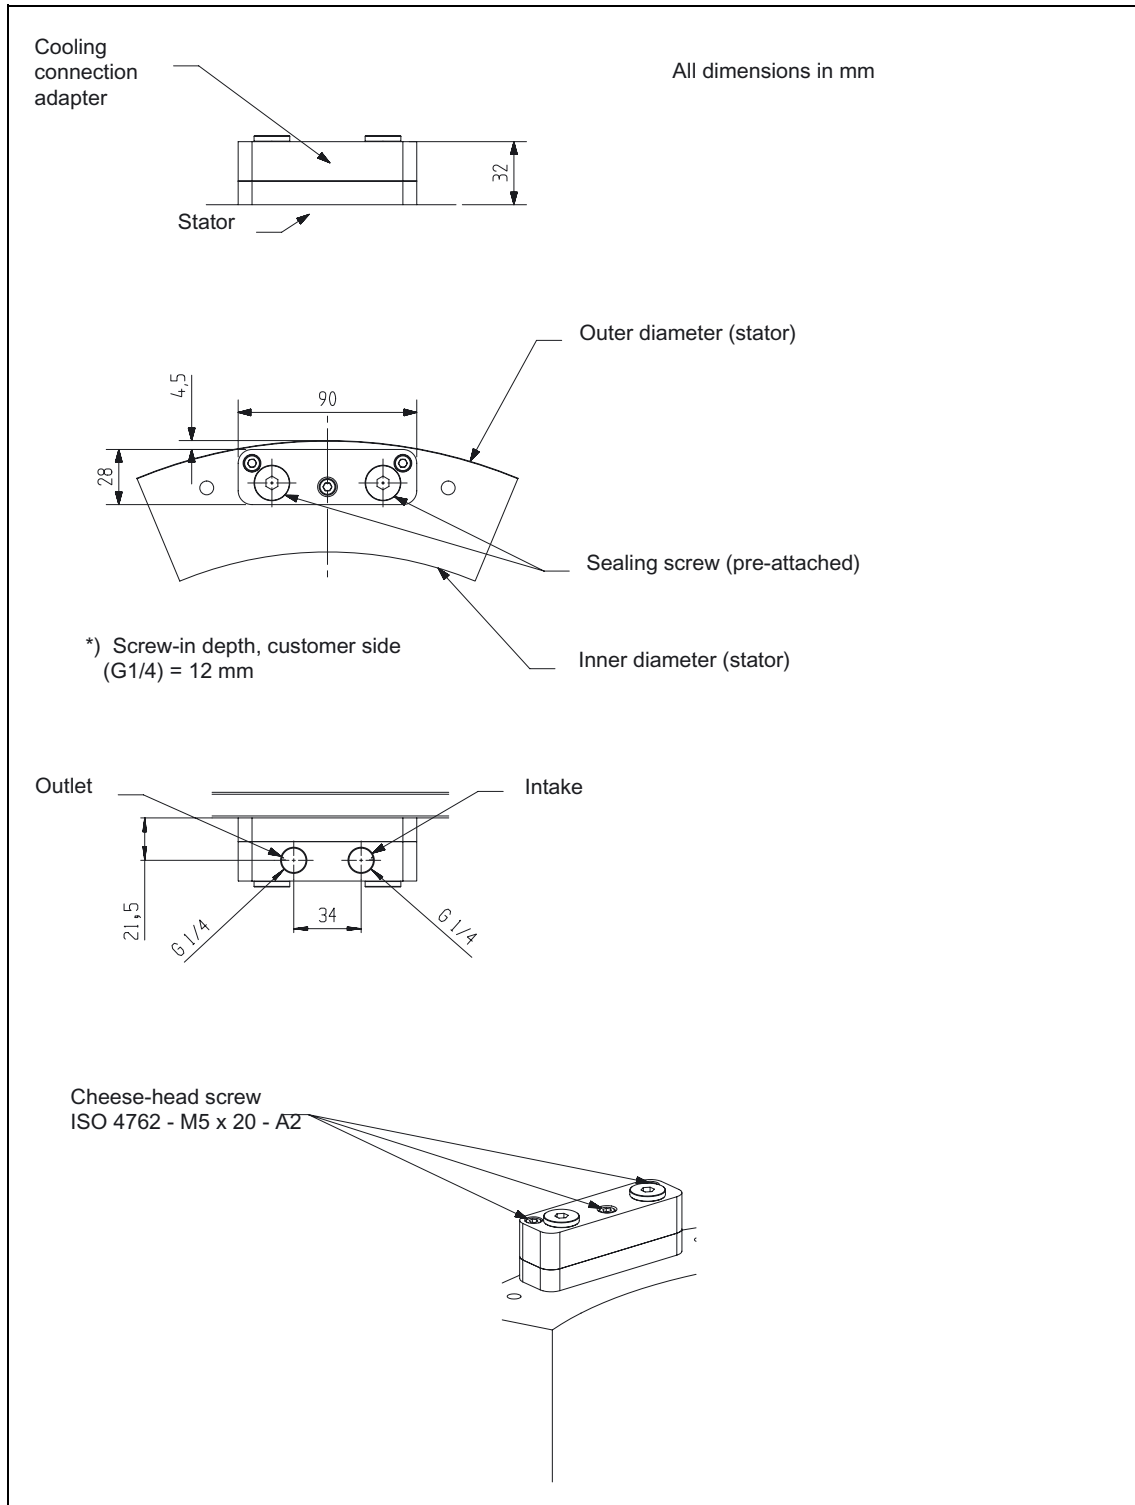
Radial cooler connection for 1FW6160, 1FW6190 and 1FW6230
